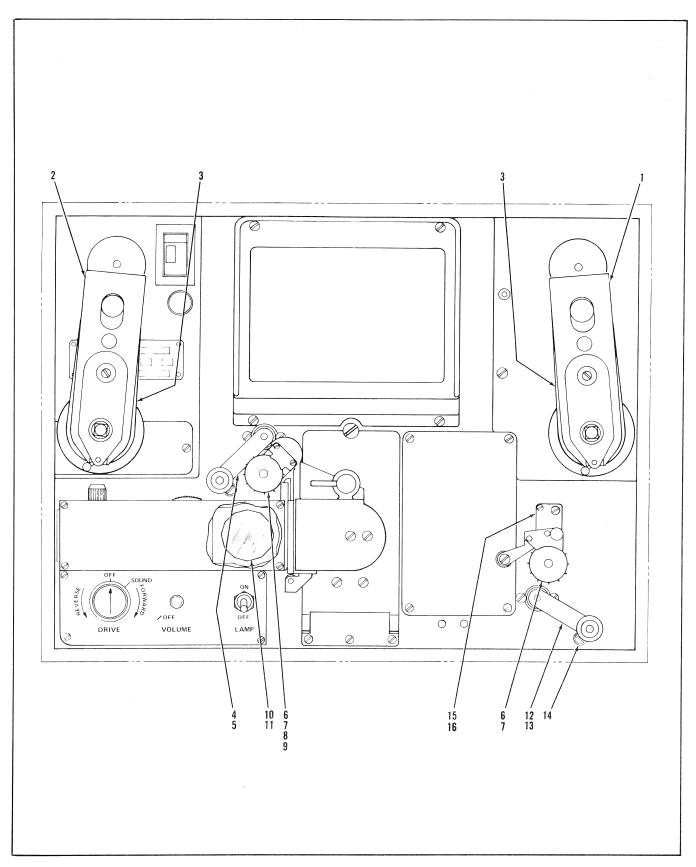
Drive Assembly (Sheet 1 of 2)
